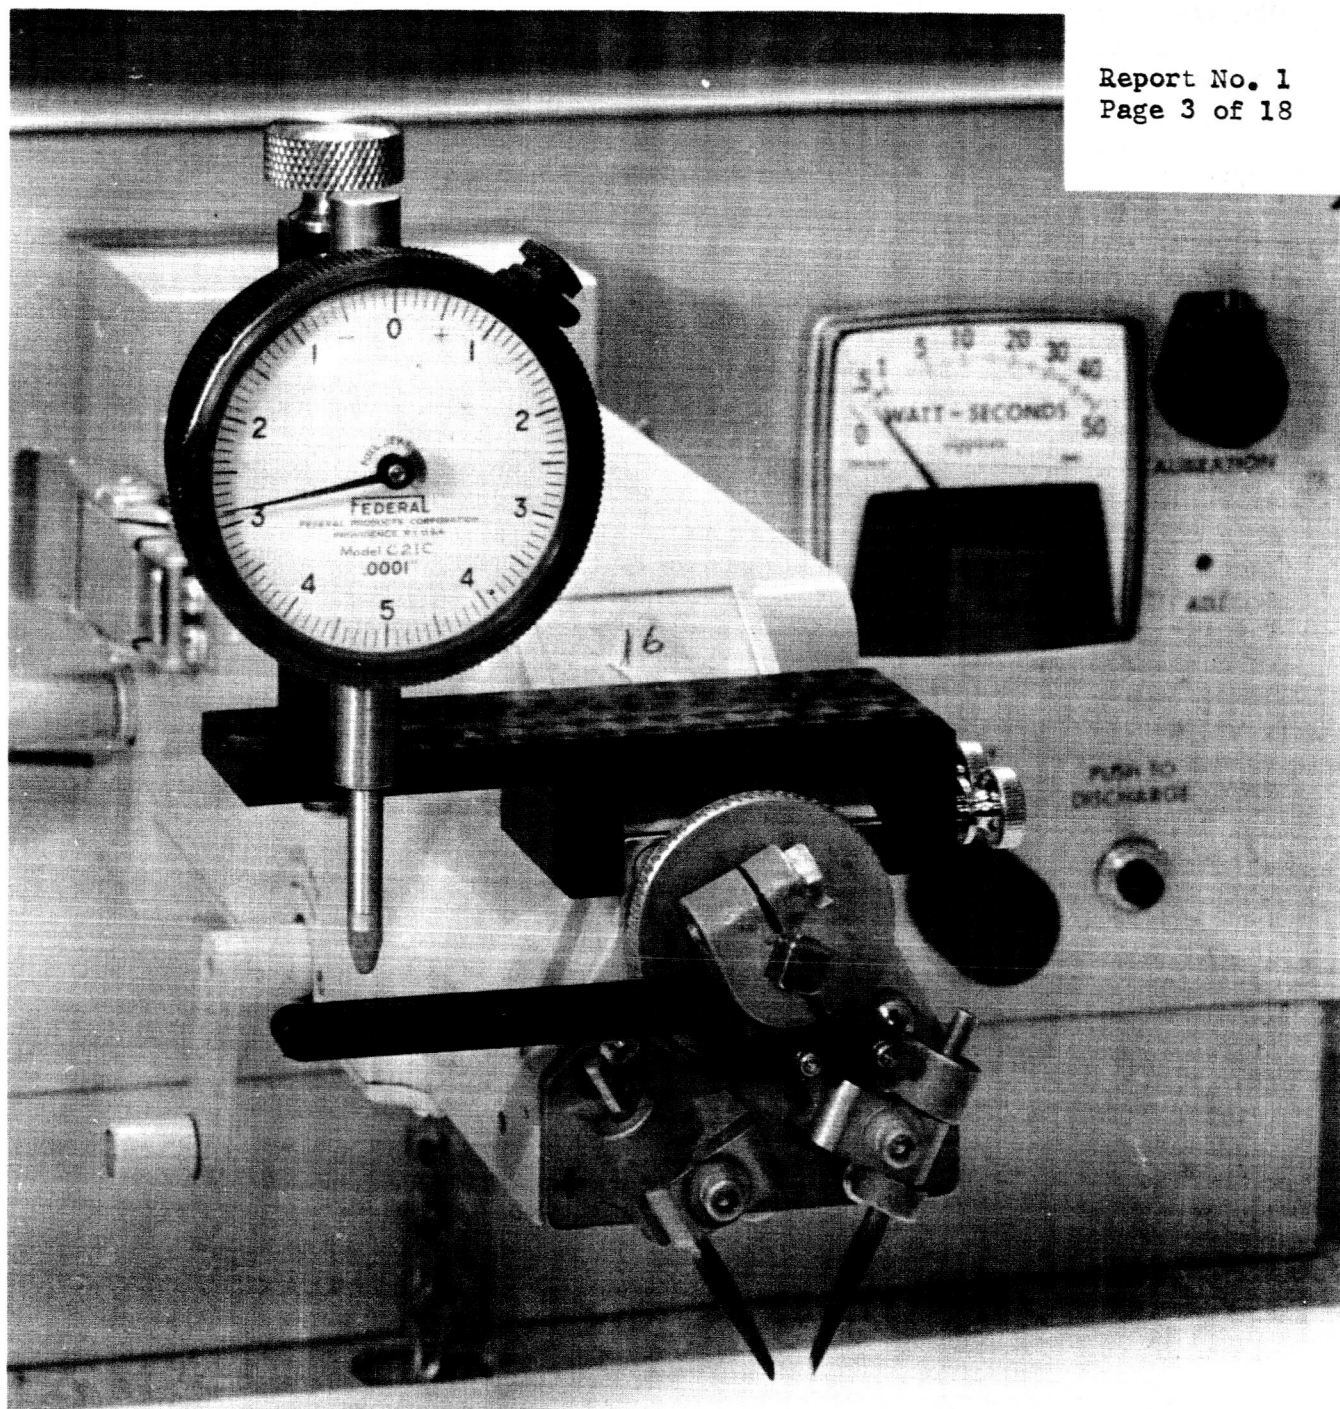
Electrode movement measuring device installed on welding equipment.
